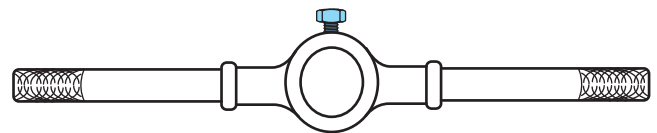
A die handle used to rotate a die while cutting threads on a metal rod.
